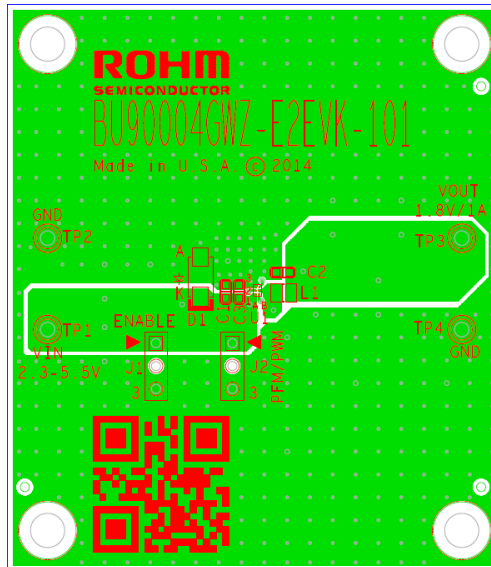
BU90004GWZ-E2EVK-101 Board Layout
